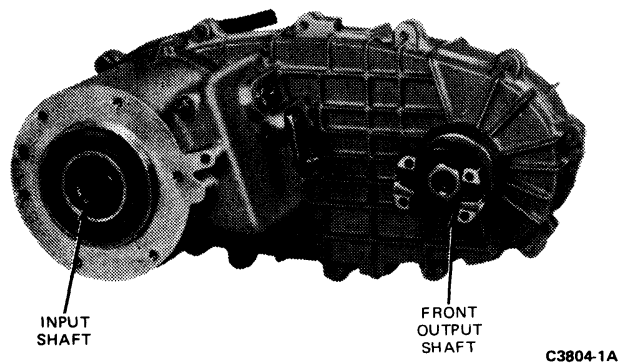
Borg-Warner 1345 Transfer Case—Front View Case Half
